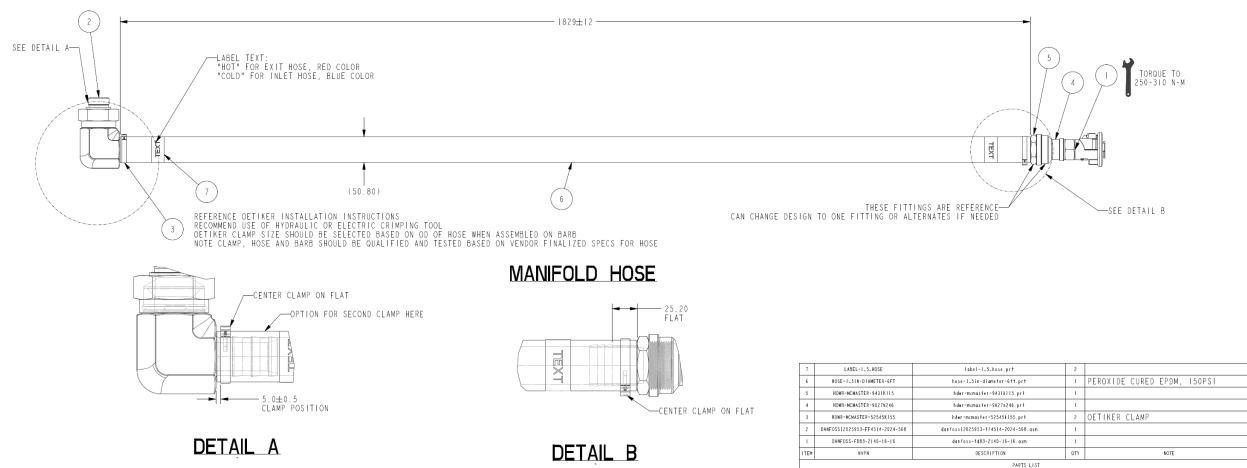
MGX Rack Manifold Drawing – Hose Assembly
